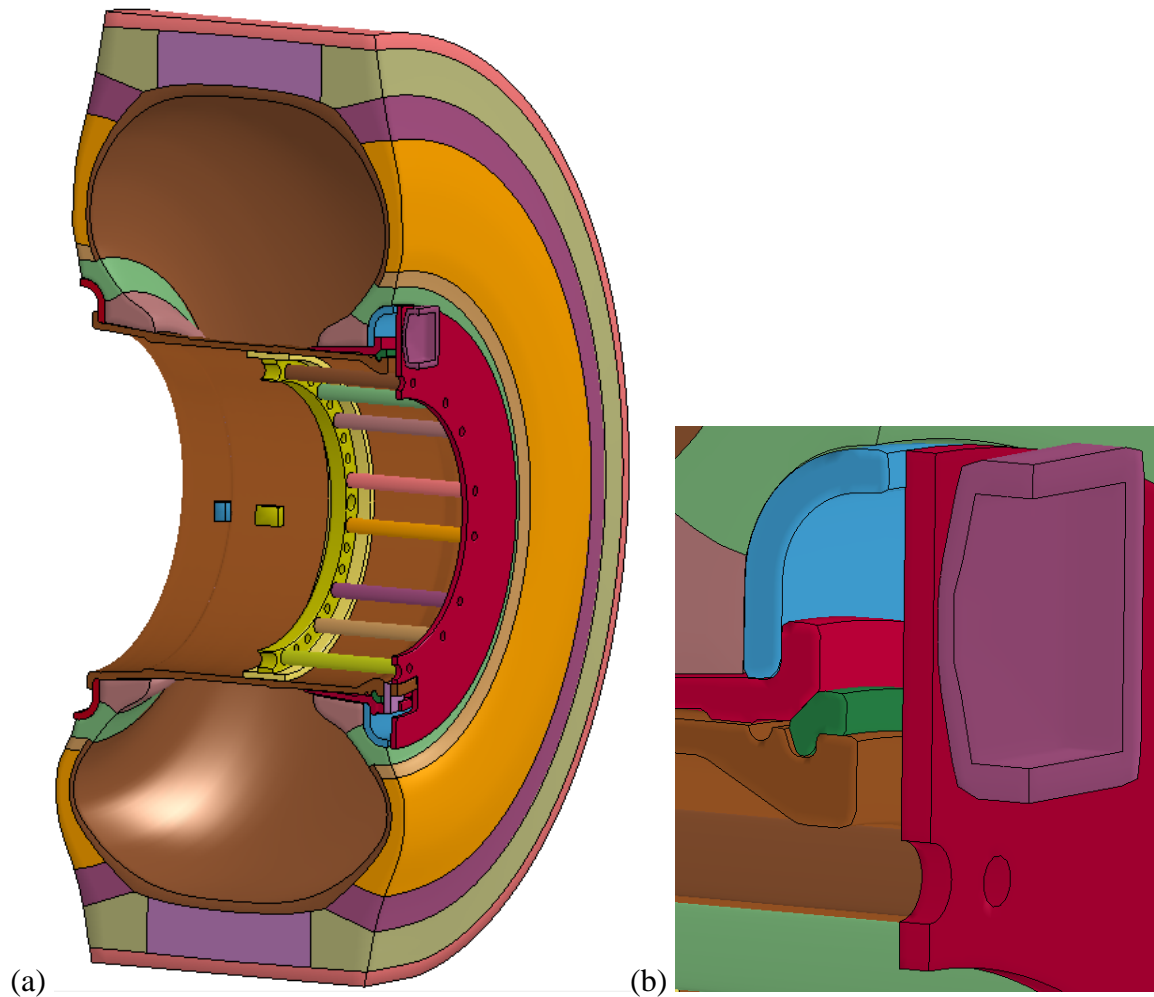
a) Cross-section of rotational side impact virtual testing apparatus and b) an enlarged view of the striker to wheel contact area.
